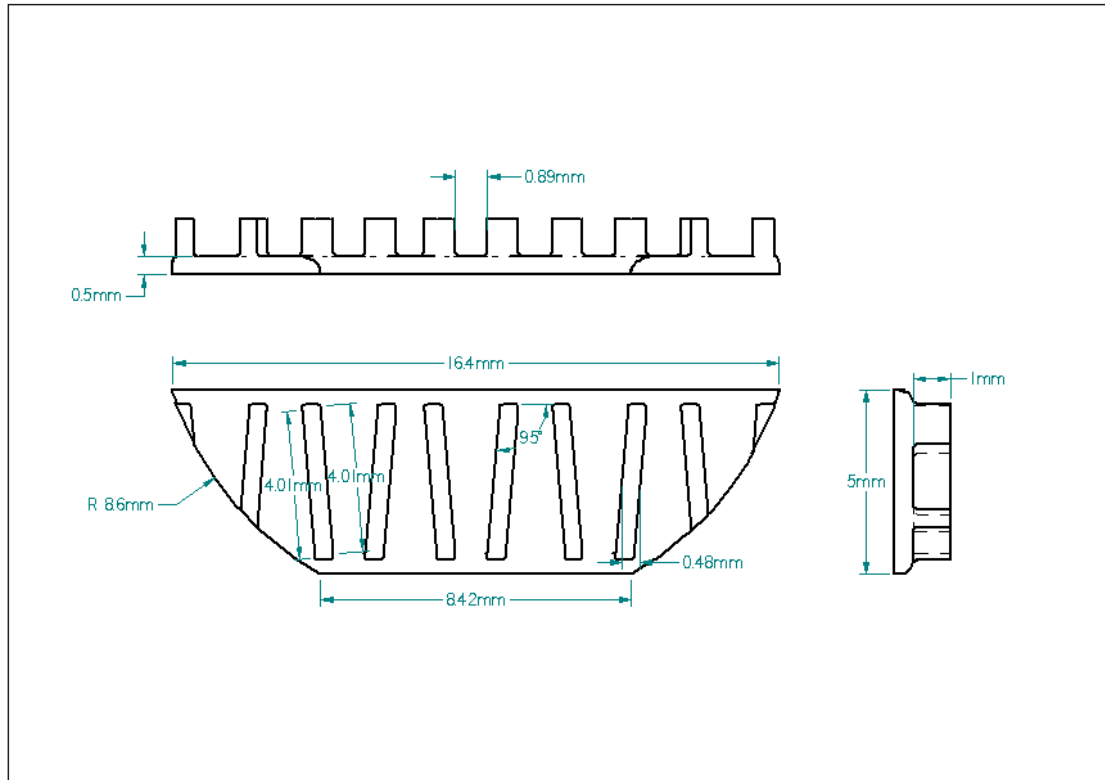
CAD drawing of the No Fins vortex generator design
